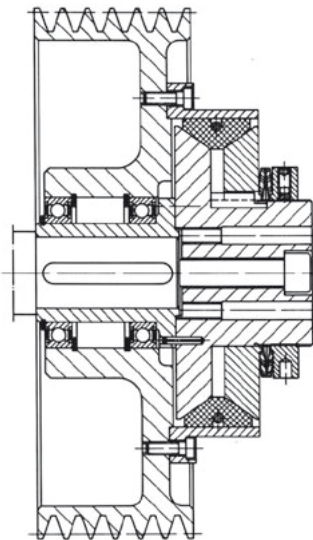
Conax®-Slipping Clutch type CR- F with V-belt pulley
